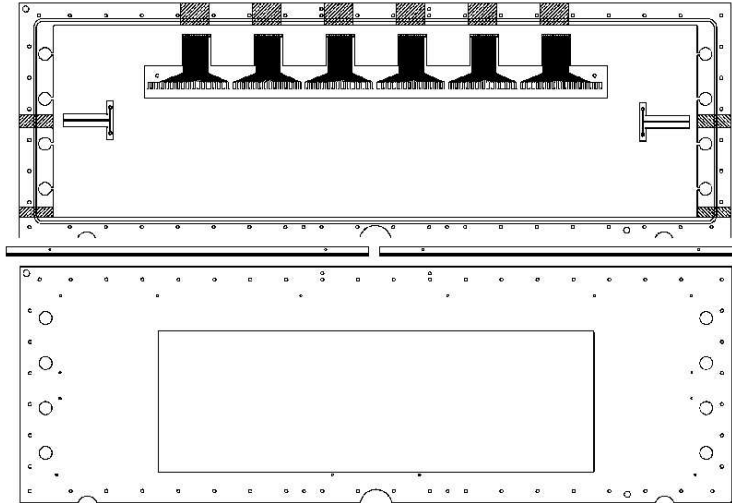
A schematic of the HERMES front chamber sub-frame (lower) and sealing frame (upper) pieces that make up a plane. The region 2 chambers will have a different shape, but they will use similar mechanical construction techniques and materials and use the concept of having all electronic readout at the top of the chamber.
